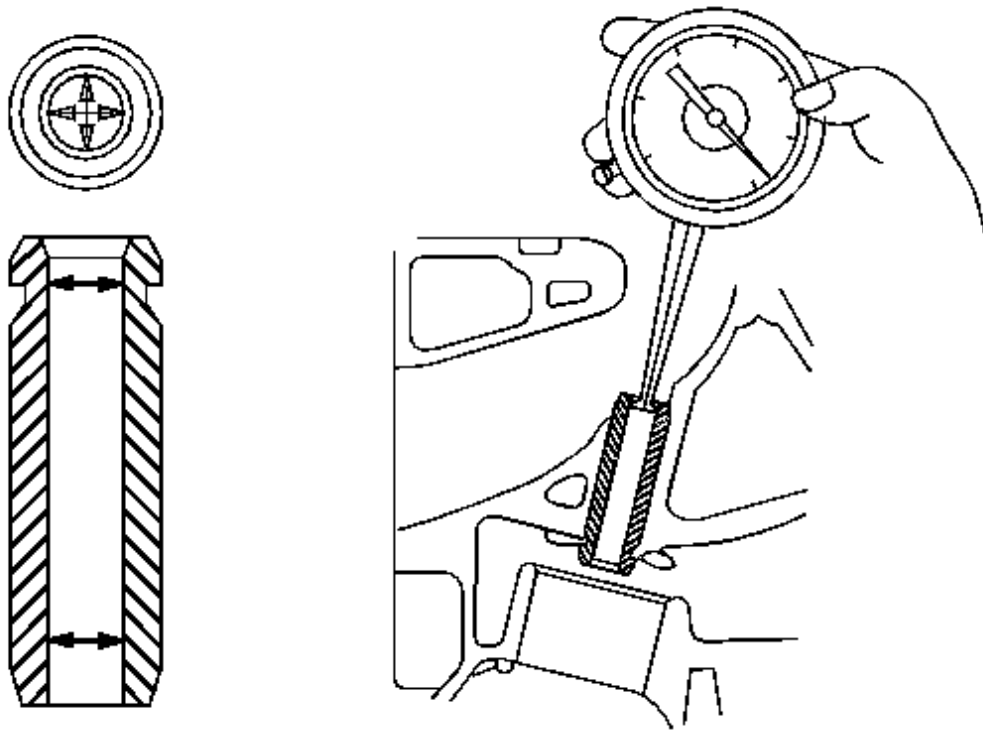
Measuring Inside Diameter Of The Guide Bush
